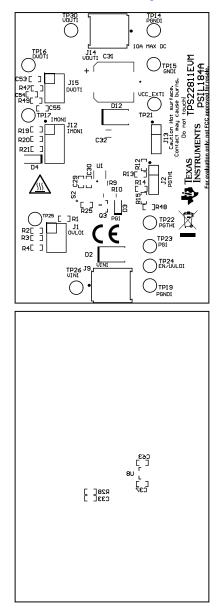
TPS22811EVM Board (a) Top Assembly (b) Bottom Assembly
